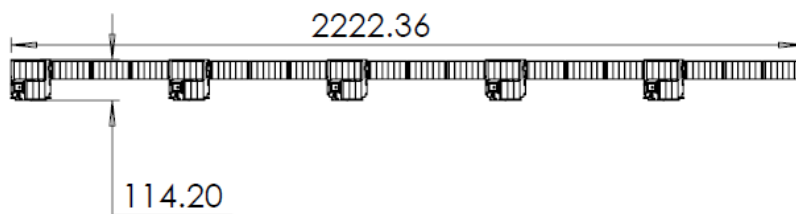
Double Frame ThinSat Unit Detail, Dimensions in mm
